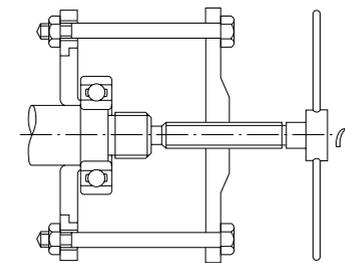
Removal of Inner Ring Using Withdrawal Tool (1)
